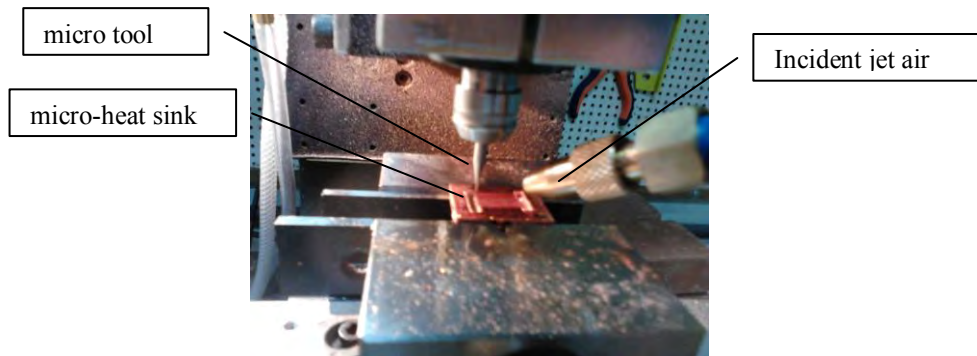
Process of machine heat sink in copper plate by the micro milling Mini tech.
